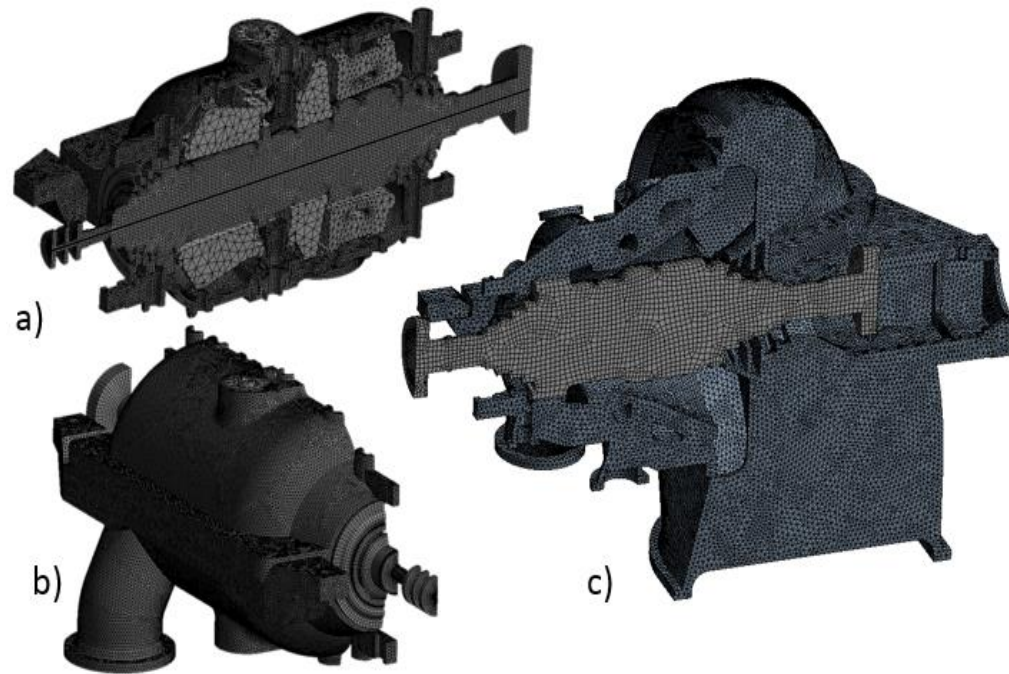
Fig. FEA Models for 40 MW Steam Turbine Casing Components and Rotor (3D)
